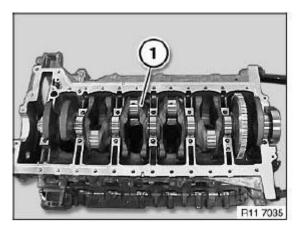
Identifying Crankshaft Courtesy of BMW OF NORTH AMERICA, INC.
